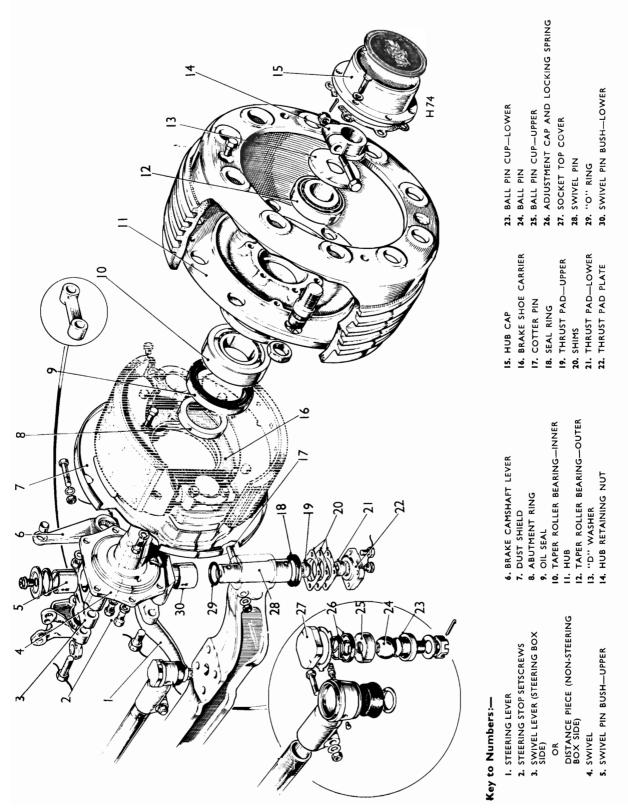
Front axle with cylindrical thrust pads (see "Note" Section 3)
